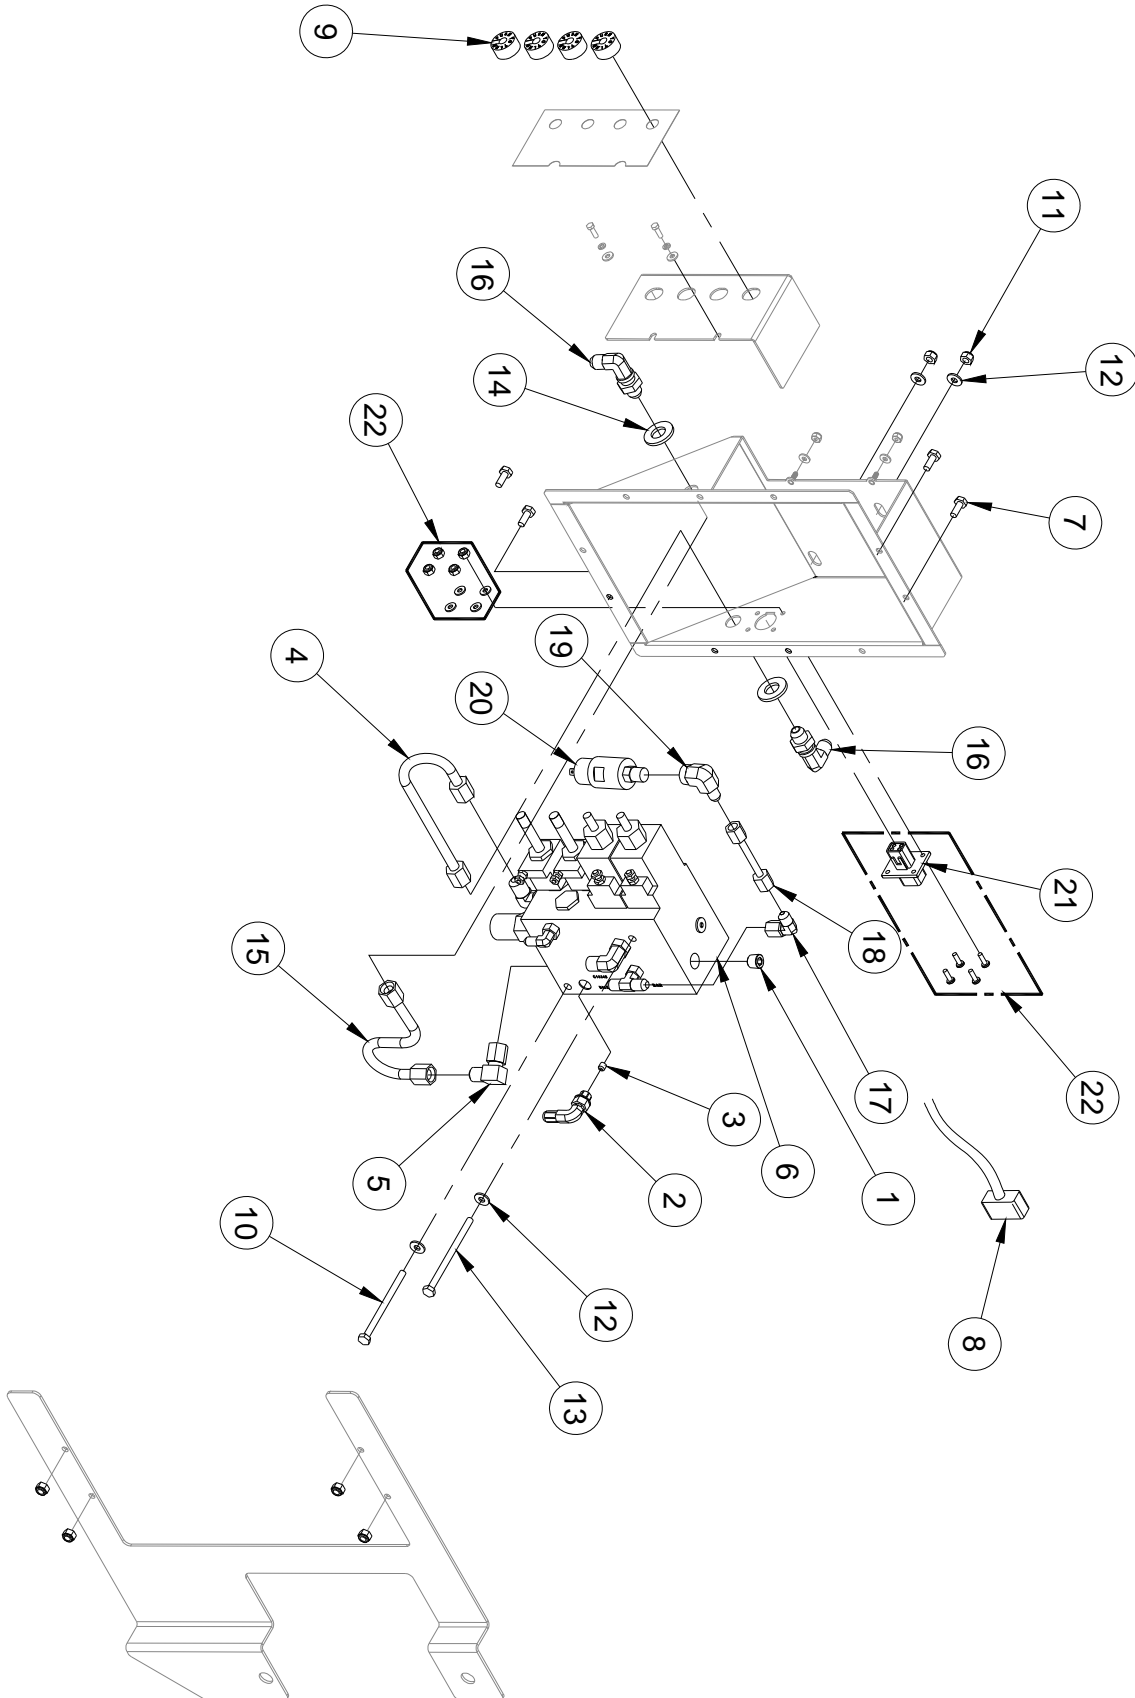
MANIFOLD ASSEMBLY (SSBF3761-1)
